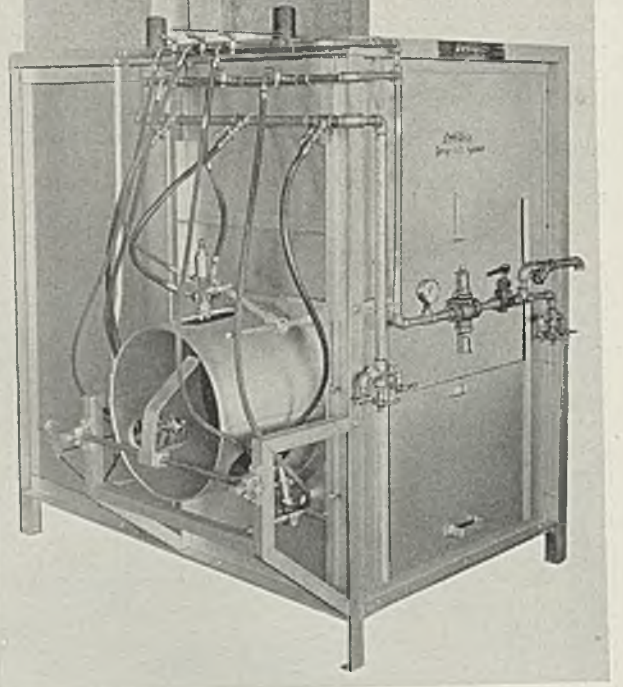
(Right)—This is a high-speed fully automatic machine for coating the interior of pipe. It is a good example of how a special machine can be built for a specific job
